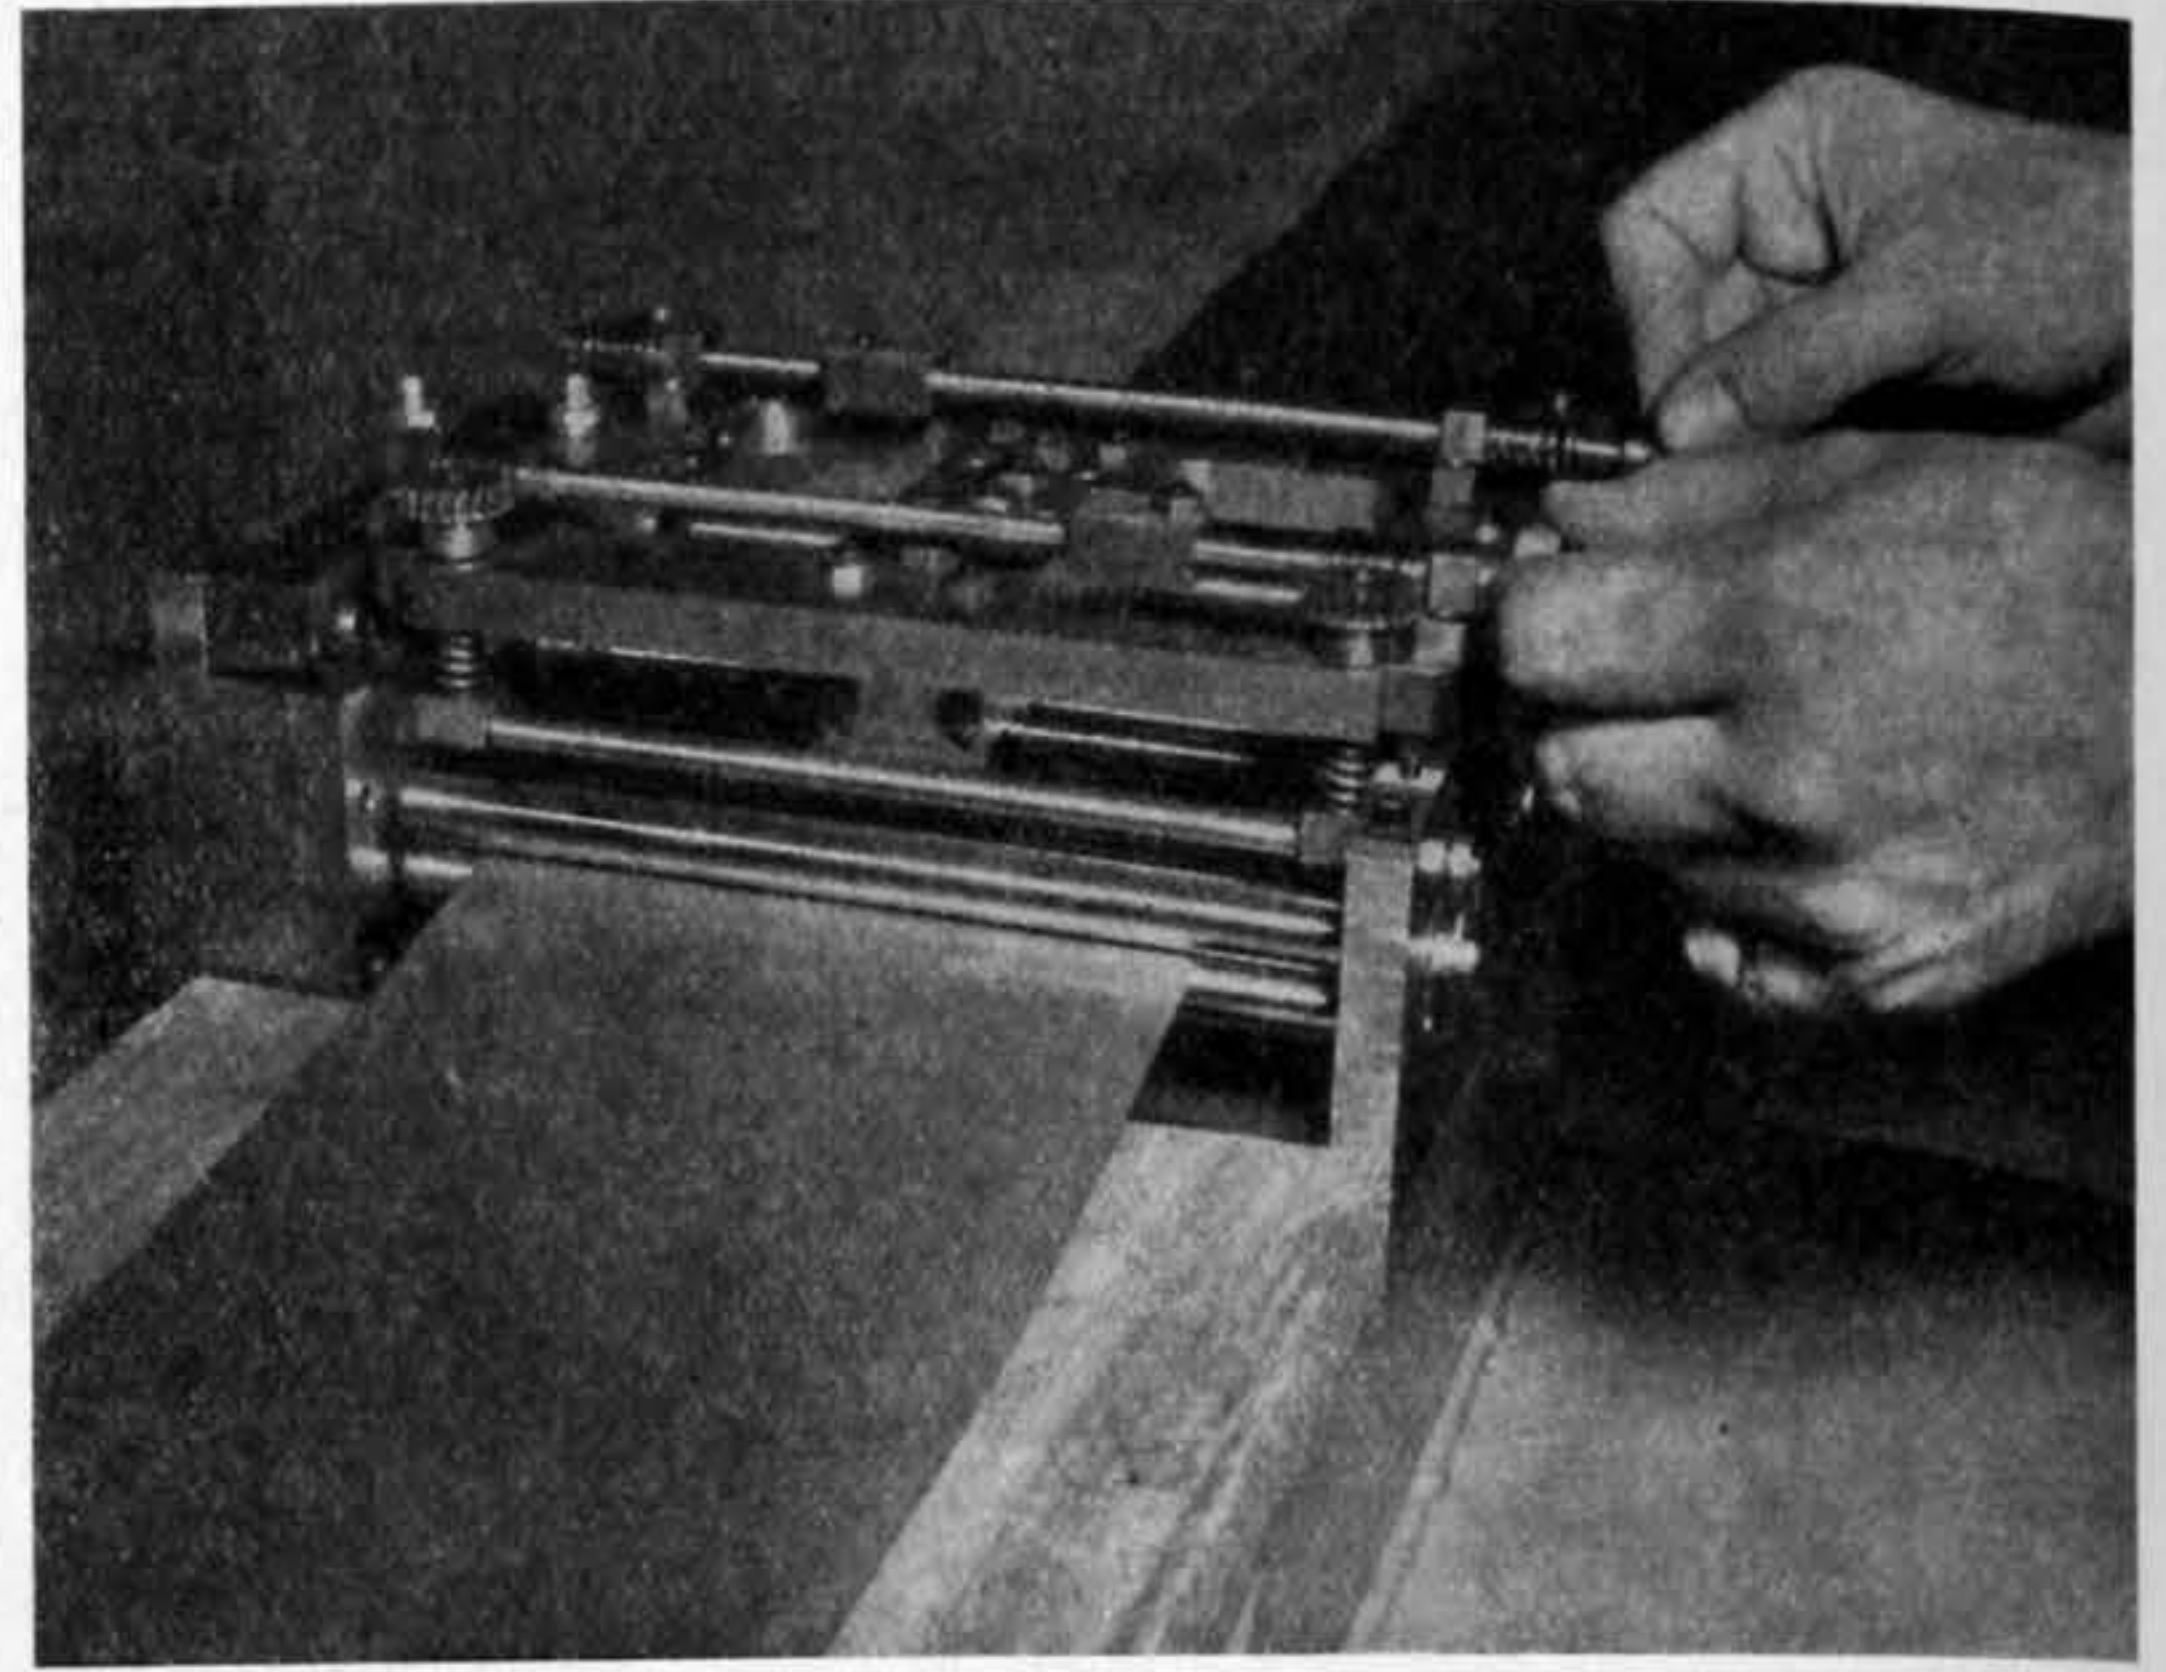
Miniature roller leveller for straightening light gauge silicon steel and nickel alloy strip
